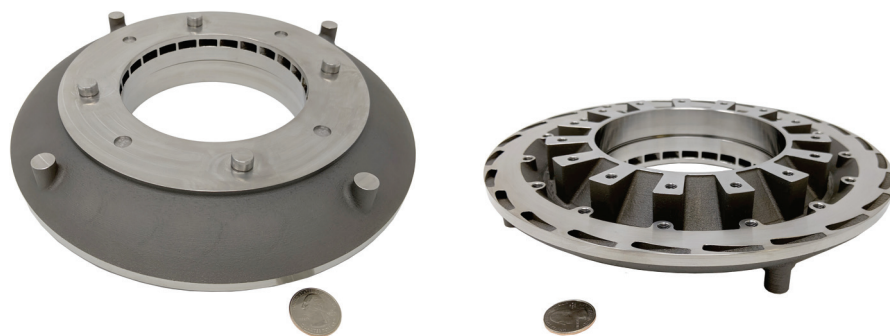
The as-printed KW Micro Power diffuser housing, top view (left) and bottom (right).
